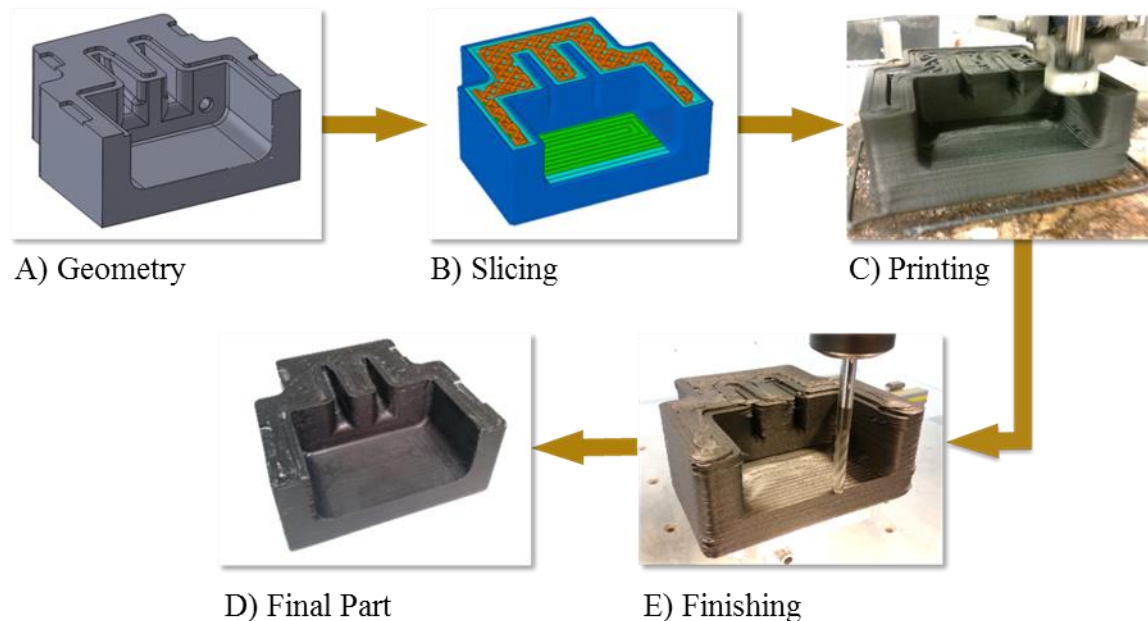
Steps for part manufacture with Extrusion Deposition Additive Manufacturing.
